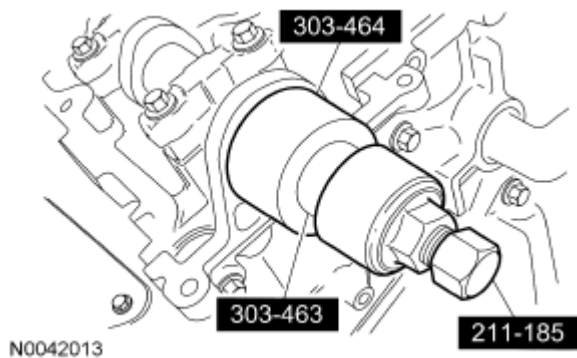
Identifying Special Tools (303-463, 303-464 And 211-185)
